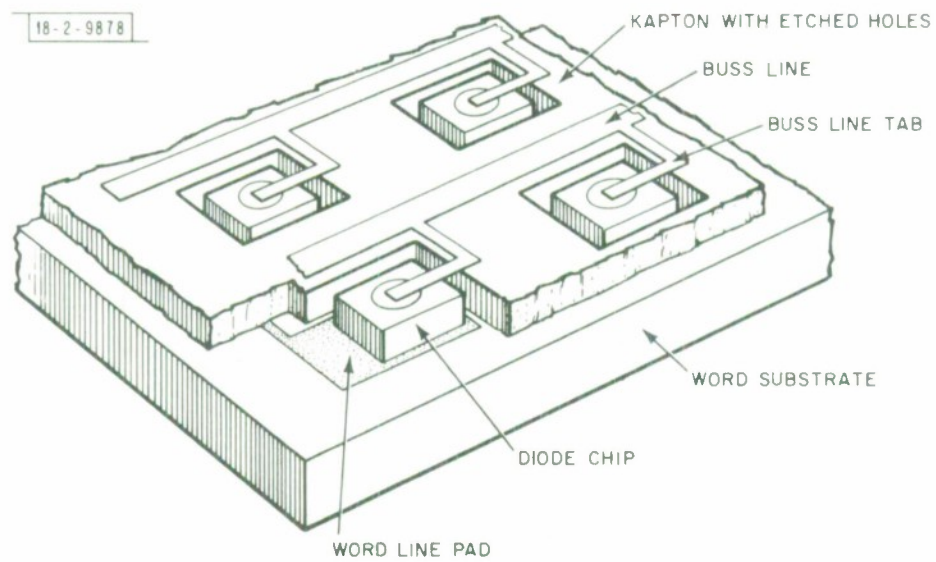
Cutaway view of hybrid diode-chip assembly.
